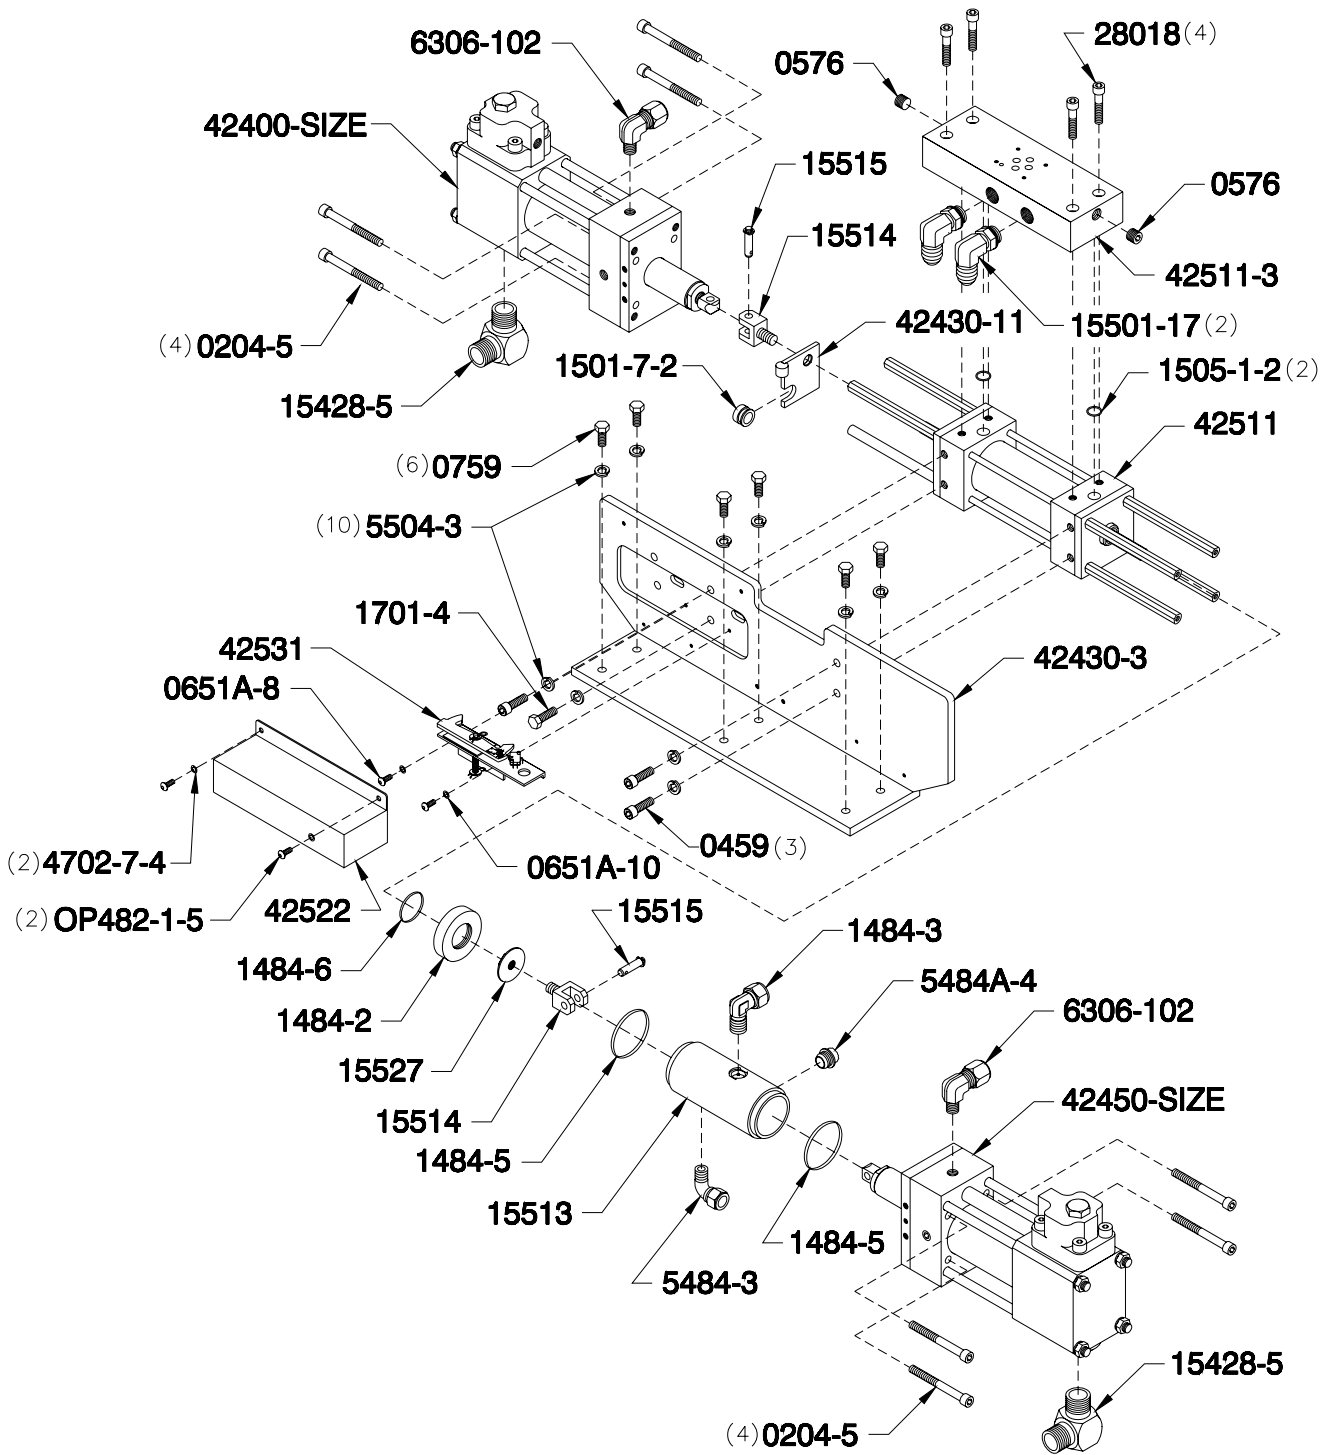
Pumpline Assembly (Part No. 42430-SIZE), Exploded View
